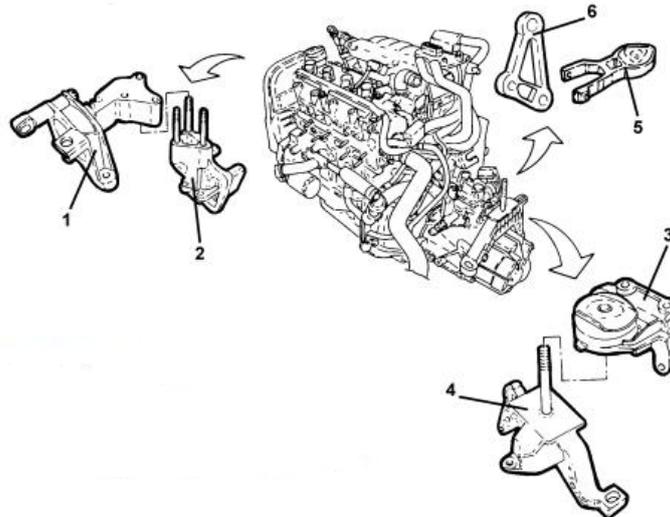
Elements for mounting investigated object (1 - flexible connector on timing gear side, 2 - rigid support on timing gear side, 3 - flexible connector on gearbox side, 4 - rigid support on gearbox side, 5 - reaction rod on differential gear side, 6 - rod fixing support on differential mechanism side) [5]
